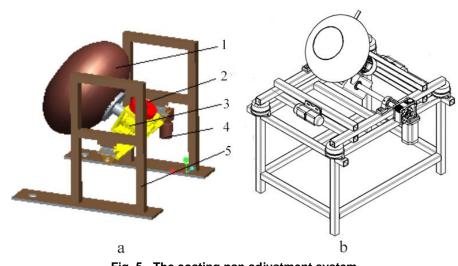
The coating pan adjustment system 1- Coating pan; 2- Driving motor; 3- Rotating rod; 4- Inclination adjustment mechanism; 5- Frame
